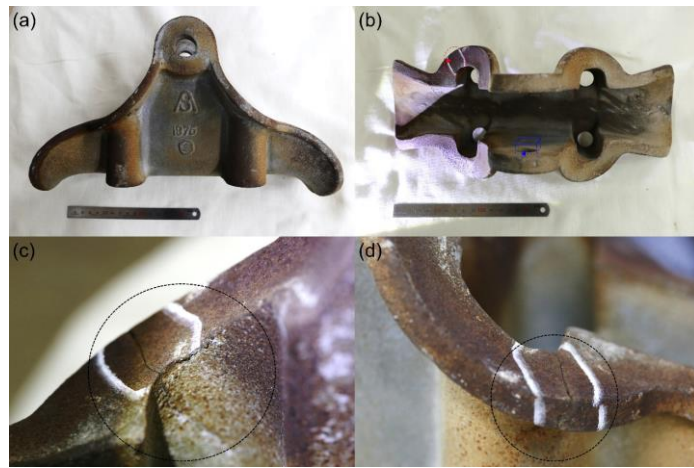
A cracked suspension clamp (a) Front view (b) Top view (c) Inner view of a shoulder (d) Outer view of a shoulder
